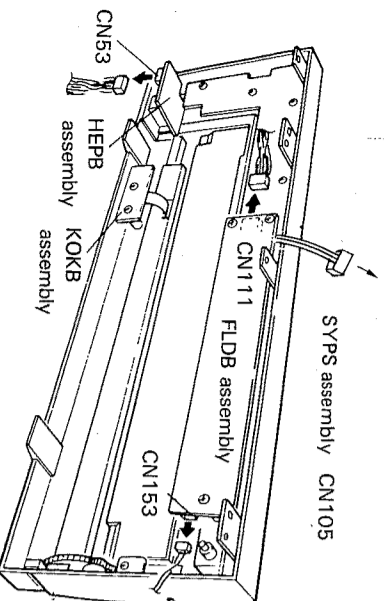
Detaching connectors from the P.C.B.'s inside of the front panel
